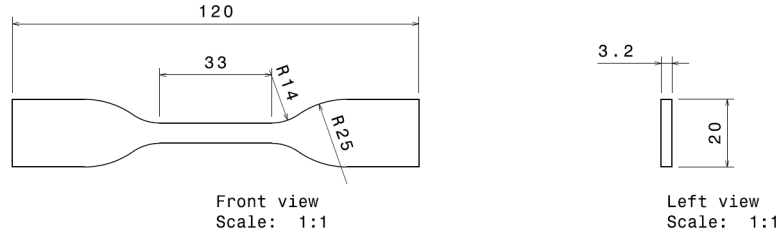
Geometry of specimens produced by LS and CM (ASTM-D638 Type IV Tensile Test Specimen) (all dimensions in mm)
